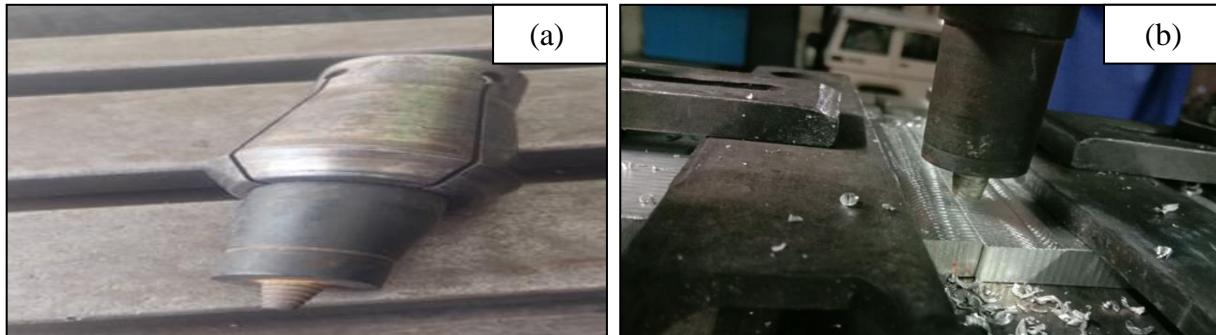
(a). HSS H13 Tool with holder for FSW; (b) Friction stir welding process setup with tool holding fixture
